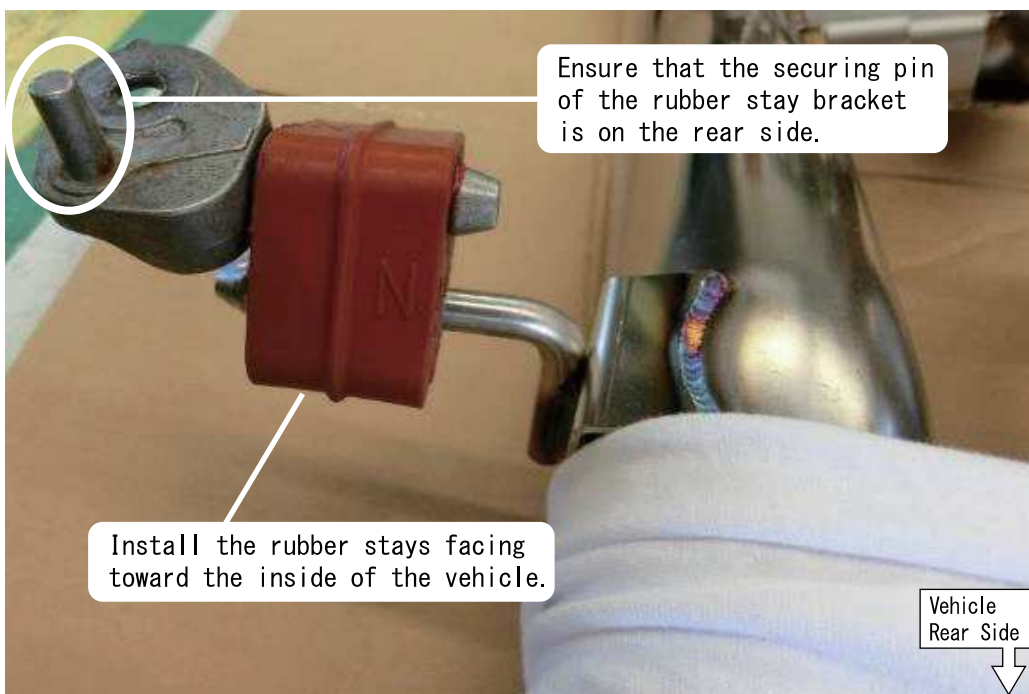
Installation details of rear side stock rubber stay brackets (photo shows braket on left side of vehicle)
